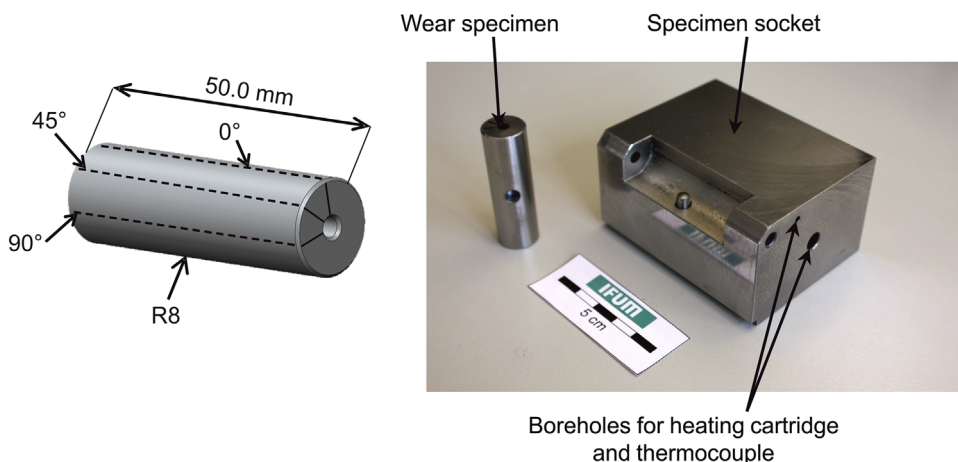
Geometry of the cylindrical specimen used for the wear investigations (left); and actual specimen and specimen socket (right) [27].
